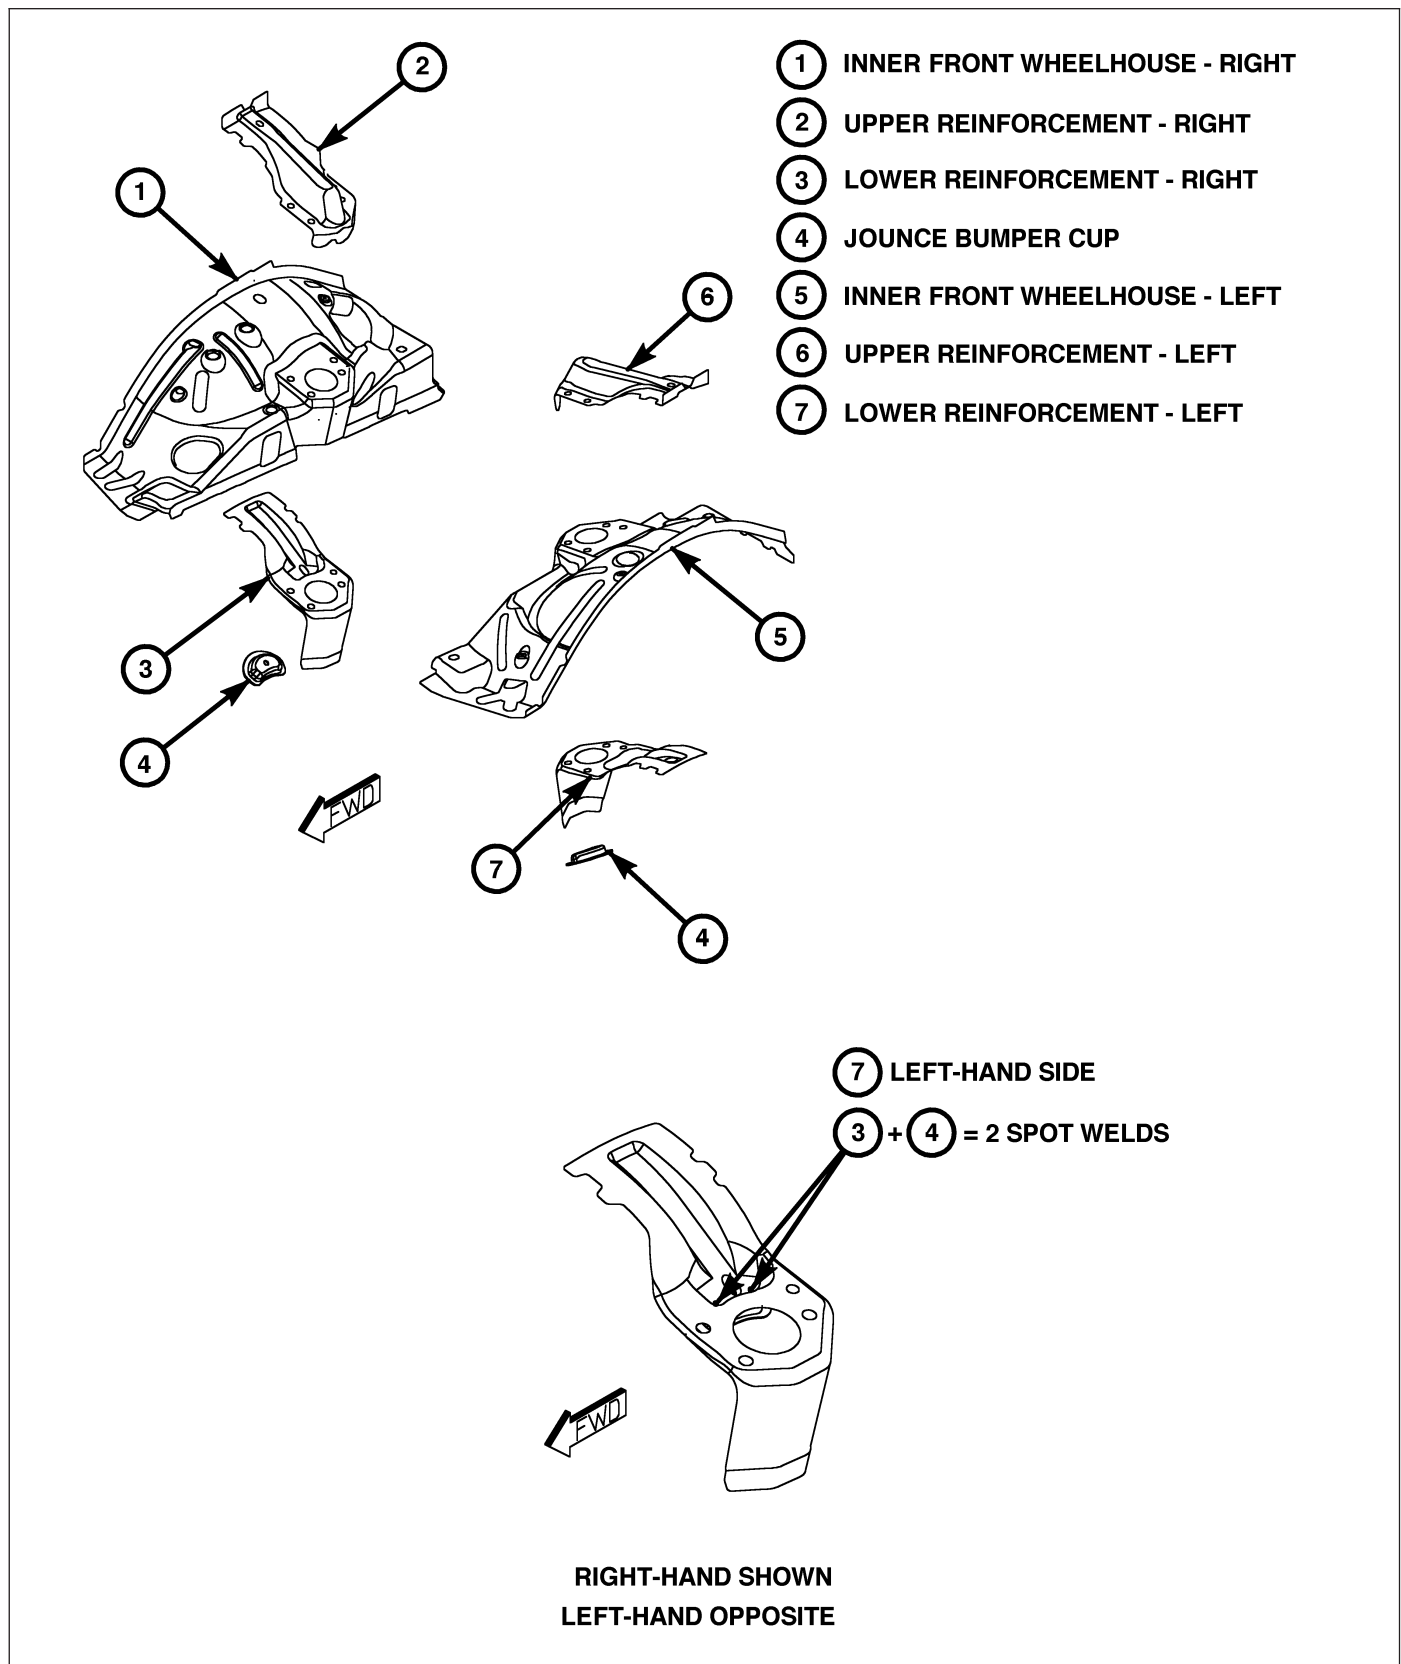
INNER WHEELHOUSE ASSEMBLIES
